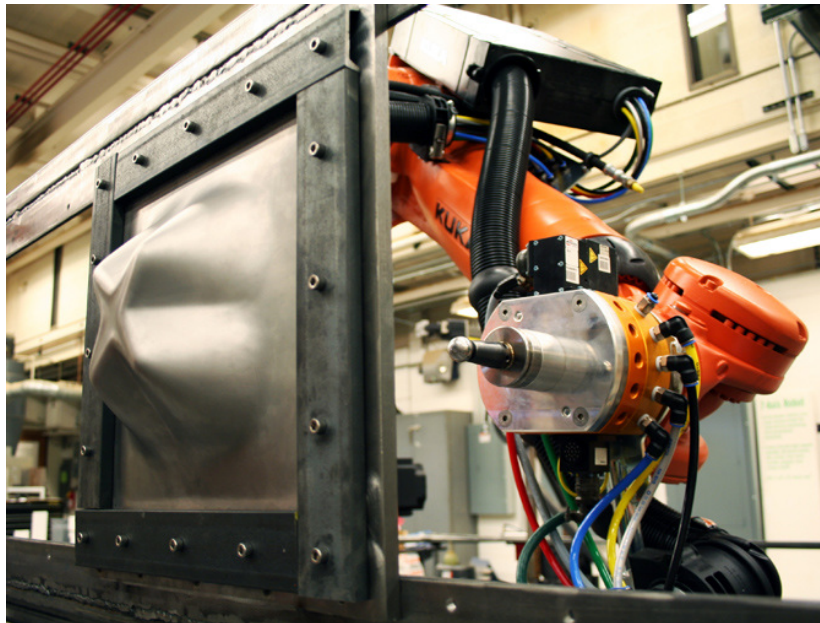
Picture of an ISF setup after forming. Setup consists of a Kuka industrial robotic arm with a forming tool, and a clamped sheet [5]. The robotic manipulator pushes the sheet from the right using a metal shank with a round tip, plastically deforming the sheet to the left. After forming, the desired part is cut out of the rest of the sheet.
